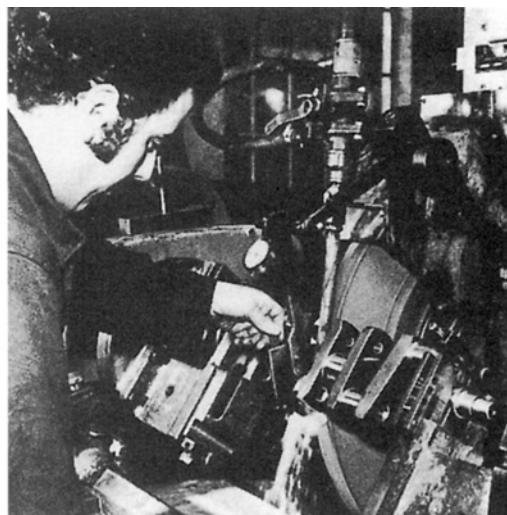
Crankshaft turning and grinding (*Laystall*)
